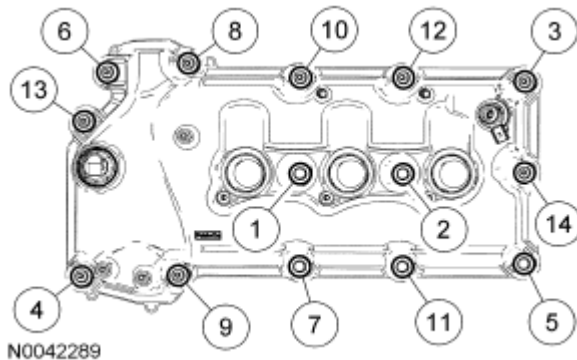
Locating Tightening Sequence Of RH Valve Cover Bolts
